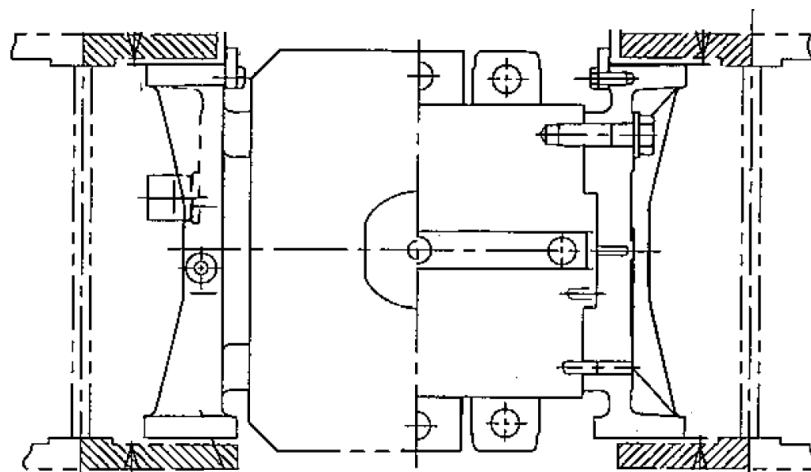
Crosshead for 6DKRN 80/230 engine
